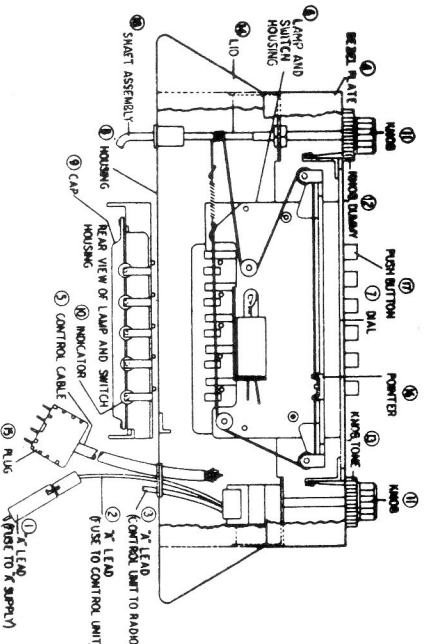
Control Unit C627M (Ford), Showing Location of Parts and Dial-Cord Installation Details
